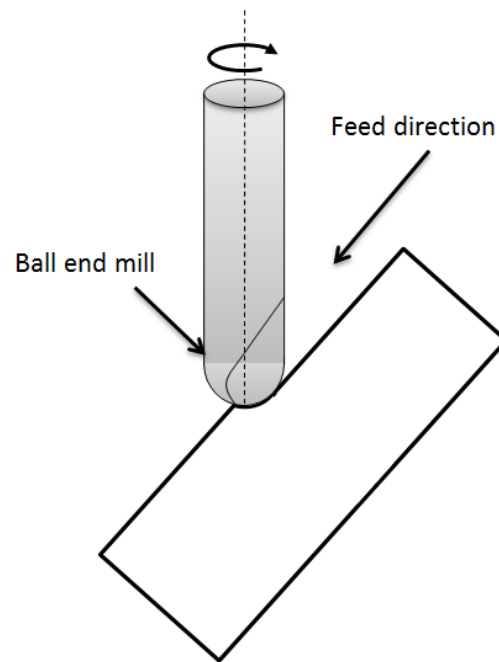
Illustration of a ball end mill performing machining with plunging movement
